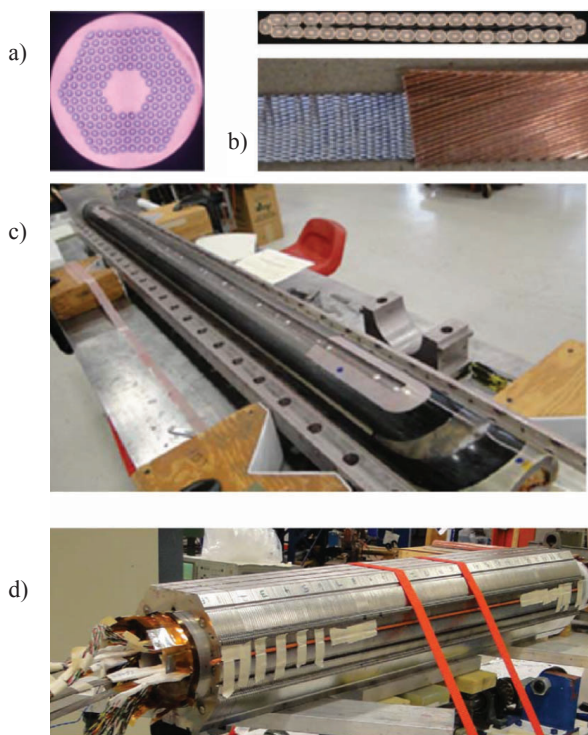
a) RRP150/169 Nb_3Sn strand; b) 40-Strand stainless steel shimmed cable; c) Reacted and impregnated coil; d) Collared prototype dipole assembly
